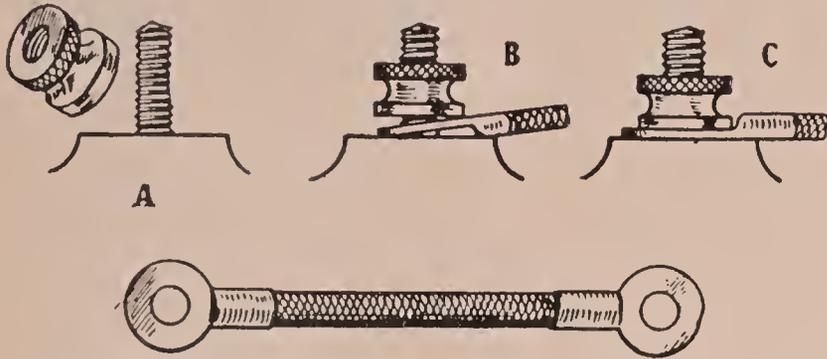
The proper and improper method of screwing on battery terminals so that they will stay on and give good contact.
